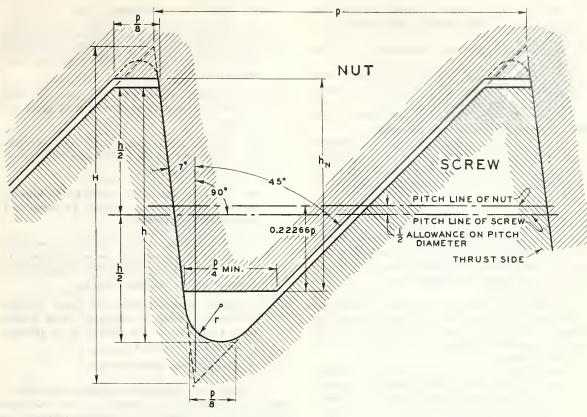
Recommended standard basic thread form for buttress threads.
